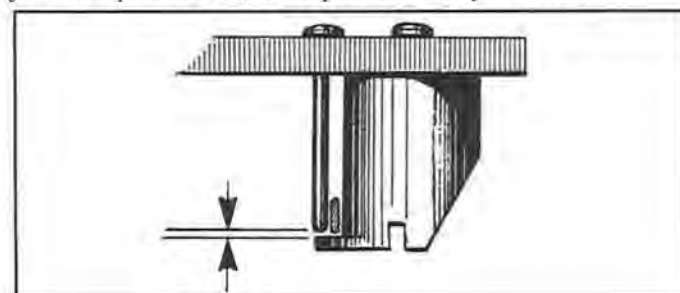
Before tapered pin is converted to cylindrical shape it must be cut to proper length.
